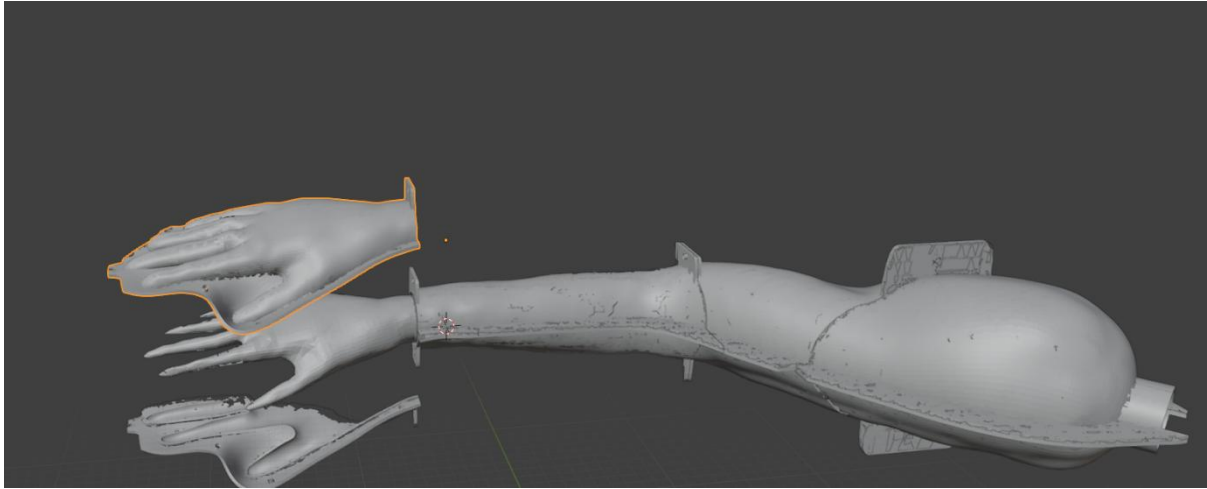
Blender model of complete arm mould assembly showing hand mould and forearm sections
